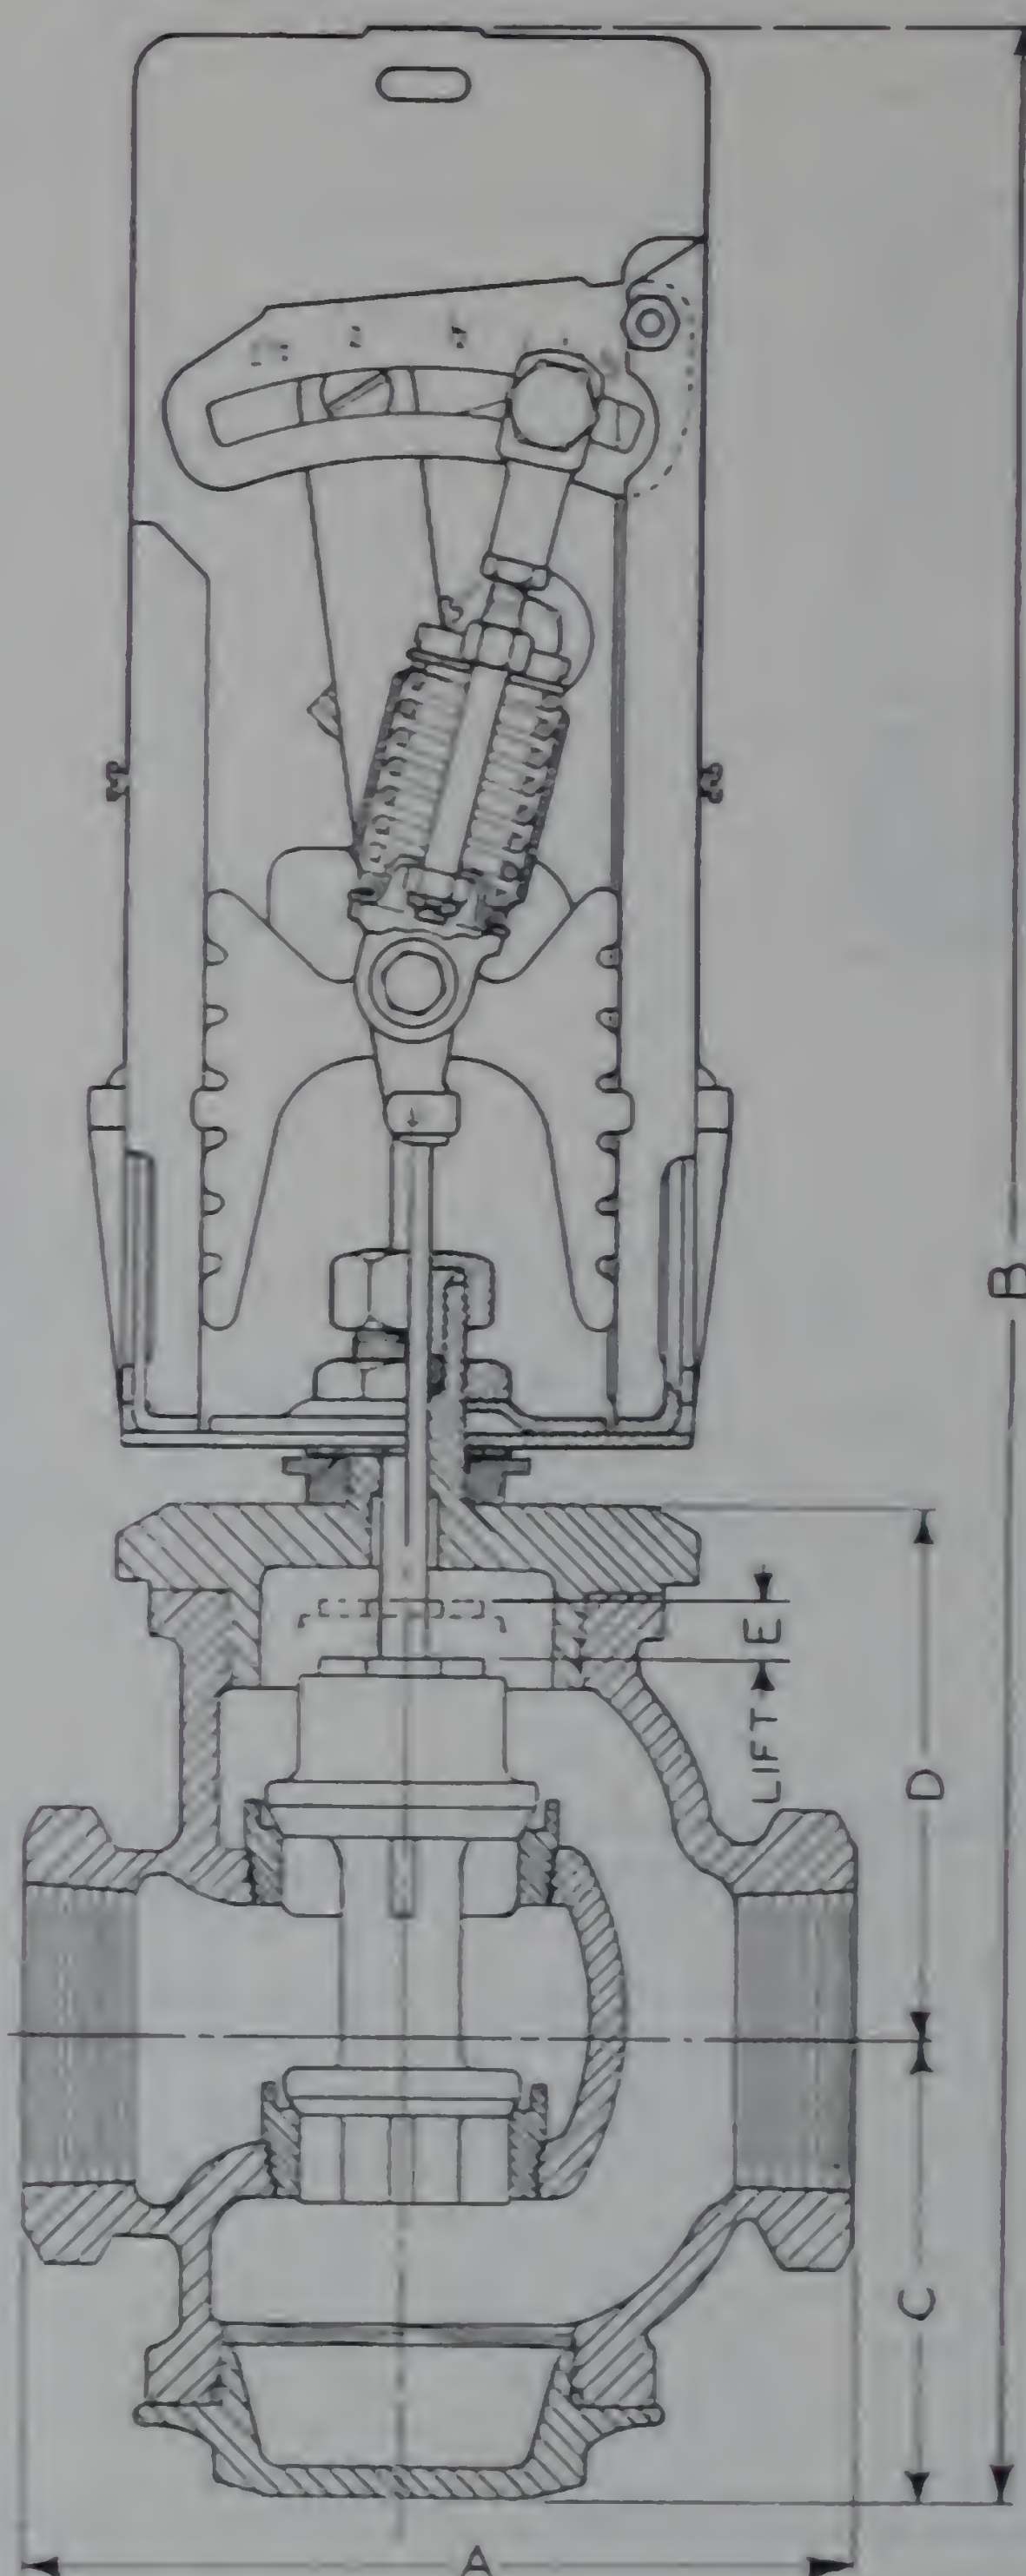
Dimensional drawing of screwed Type K201C Motorized Valve.
